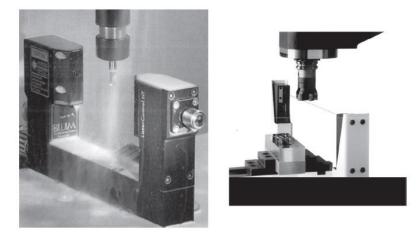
Laser control system for monitoring tool breakage and optical presetting of a cutting tool. *From Blum LMT and Renishaw.
